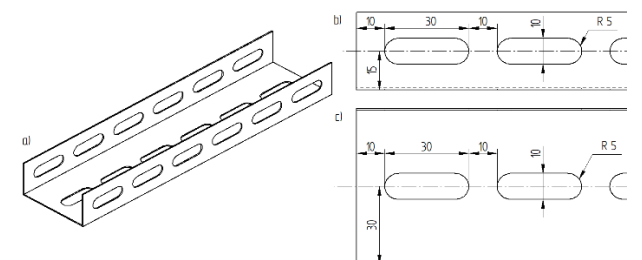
(a) Model C3 with bean-shaped holes with dimensions 30 mm x 10 mm ($R = 5$ mm), (b) geometric dimensions on the side wall part, (c) geometric dimensions on the web part
